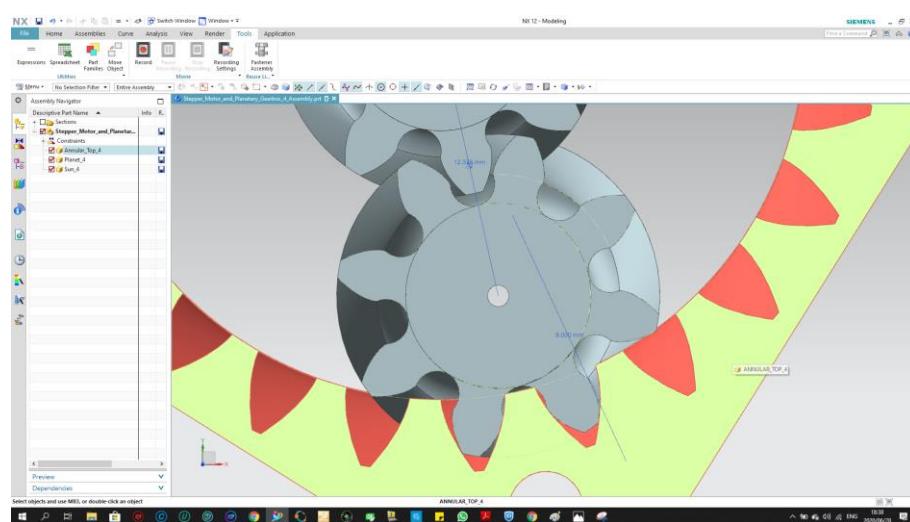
CAD Model of Interfering Gear Profiles with Inner Phase Shift of 0.28
